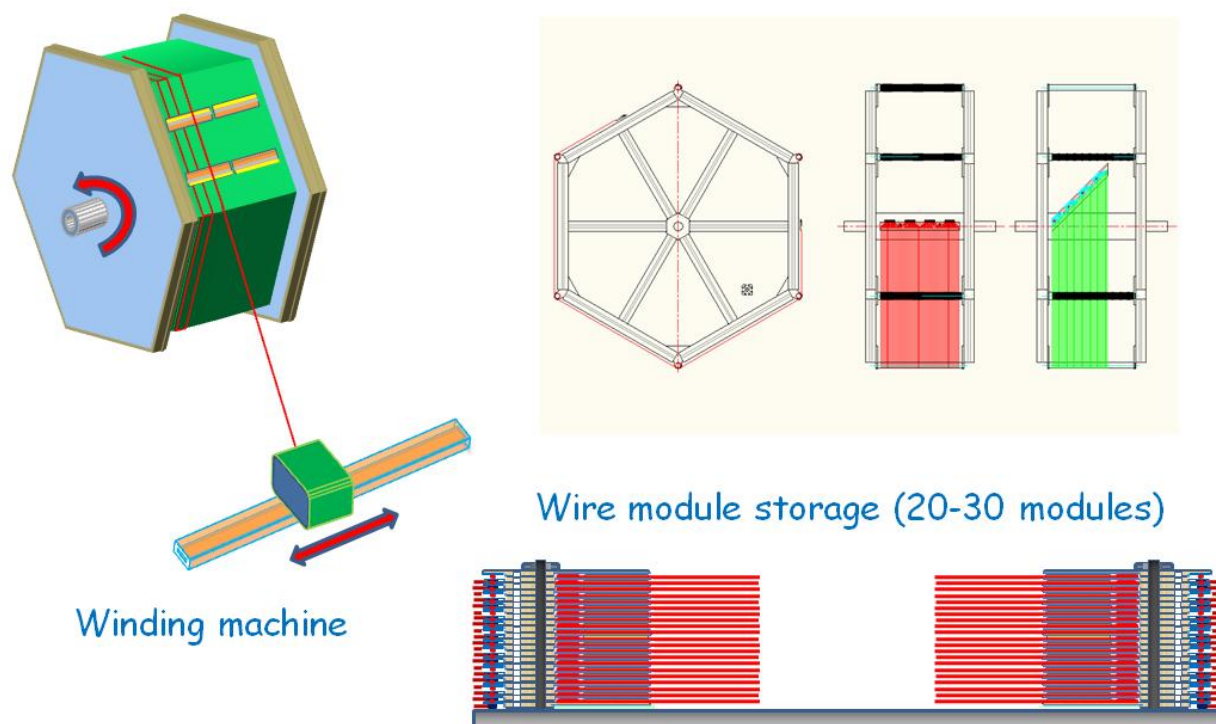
Conceptual designs of the wire winding machine and wire module storage fixture. Upper left: the fabrication of the wire modules are accomplished by attaching the wire module boards on to a large drum with specific circumference, and laying the wires over the boards at a constant pitch. Upper right: placement of the wire module boards for the X and grid wires (red), and U, V wires (green). Bottom: completed wire modules are stacked on a storage fixture.
